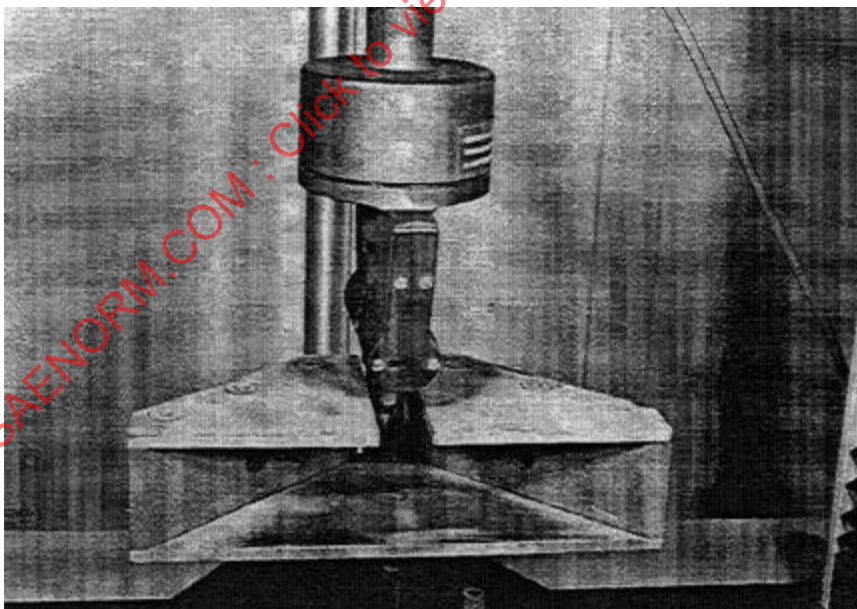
UPPER FIXTURE JAWS—EXTENDED WELL INTO LOWER FIXTURE
